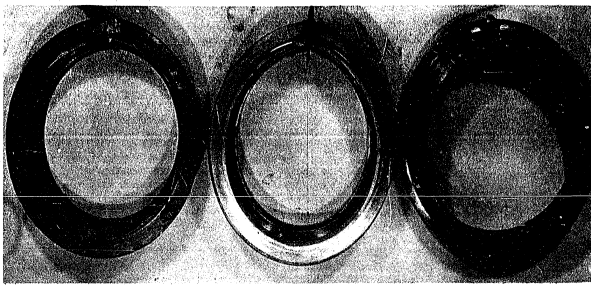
P/N 226961 RINGS FORMED AND FLASH-BUTT WELDED INTO 360°. NOTE THE OUT-OF-ROUND CONDITION AT THE WELD JOINT.
